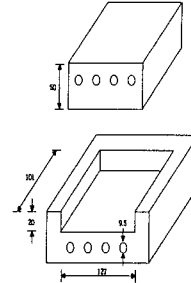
A schematic diagram of the upper and lower mold (dimensions in mm)
